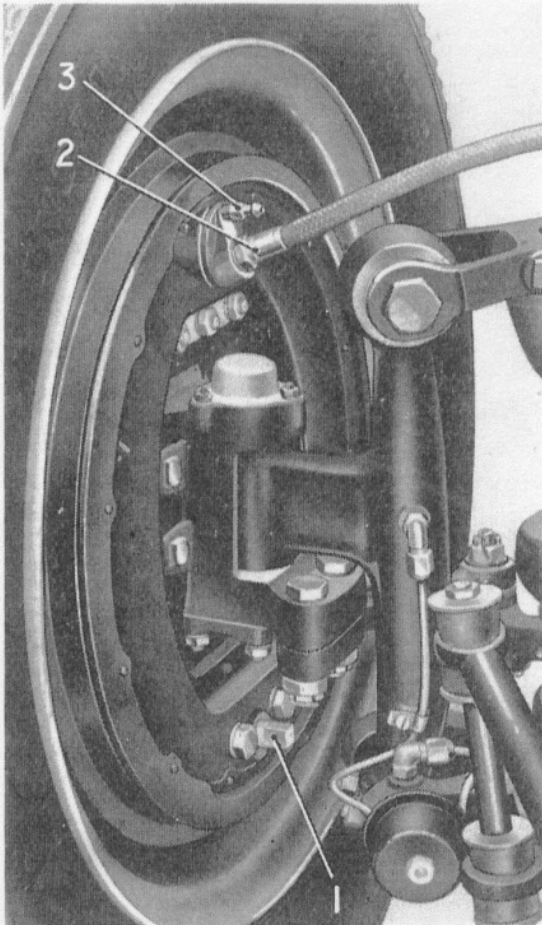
FRONT BRAKE ADJUSTMENT.
